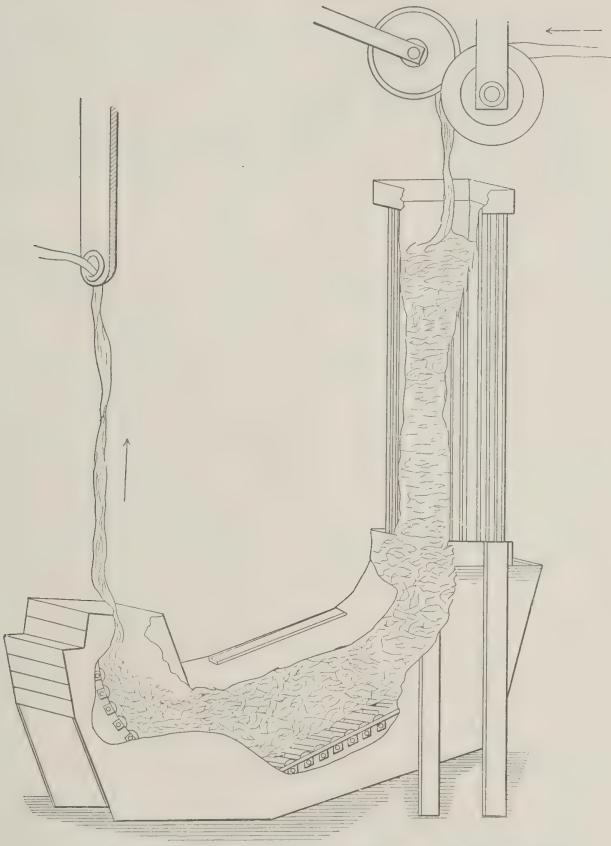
PROGRESS OF CLOTH THROUGH MACHINE.
